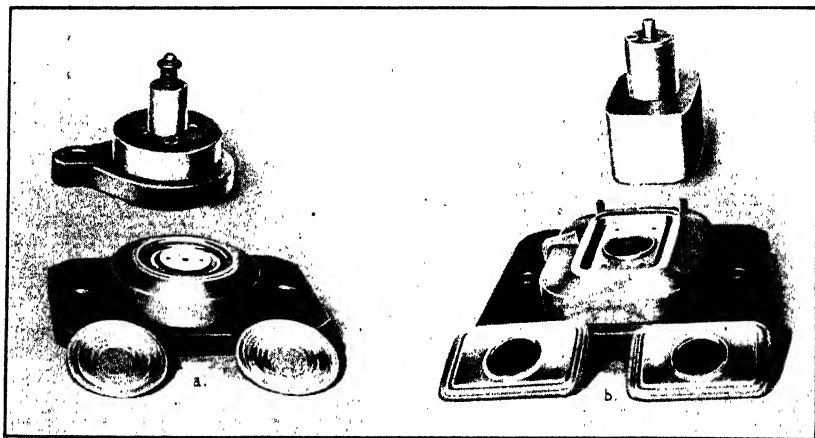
(a) A combination blanking, drawing and stamping die. (b) A combination blanking, drawing, stamping and piercing die.
